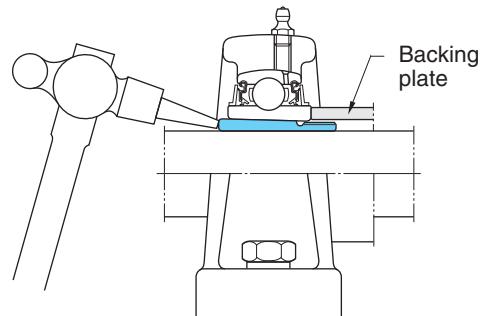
Fitting adapter sleeve to bearing with tapered bore
